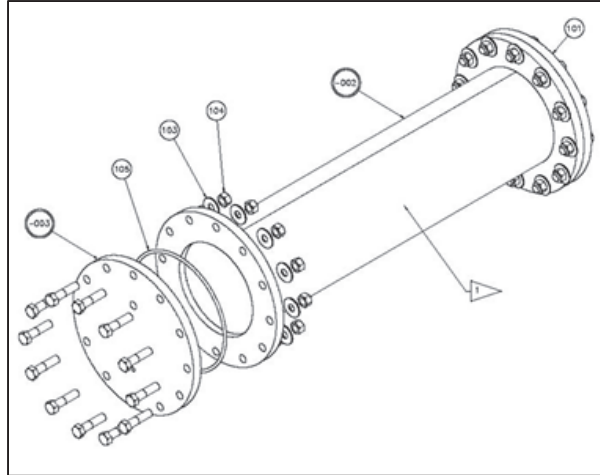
CAD geometry drawing for cylindrical pressure vessel with reusable end flanges
